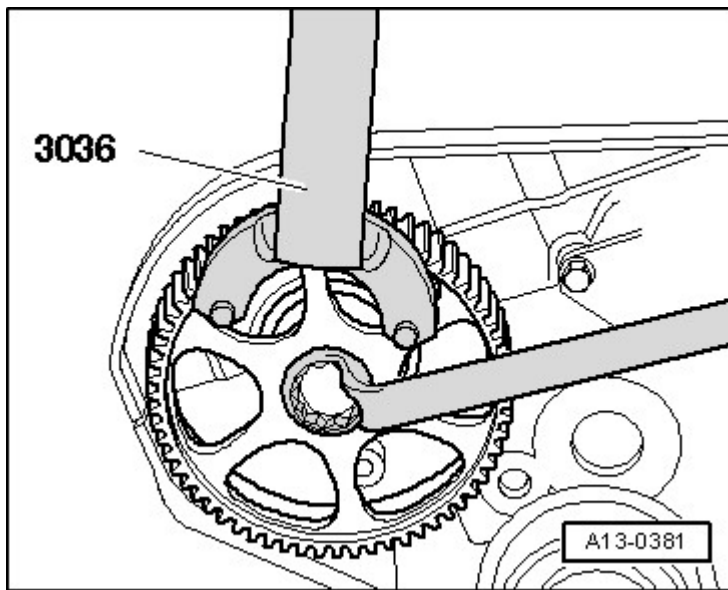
Counterholding Camshaft Gear Using 3036 Retainer
